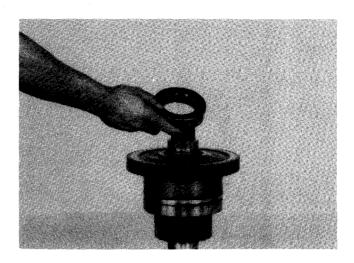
Position front bearing on clutch shaft inner race. NOTE: Bearing could be installed in transmission case before installing clutch.
